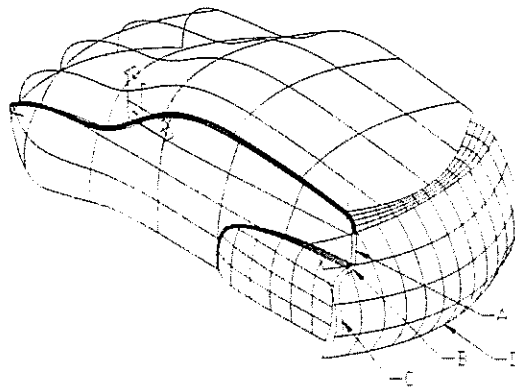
Trimmed edges copied, fillet surfaces hidden
